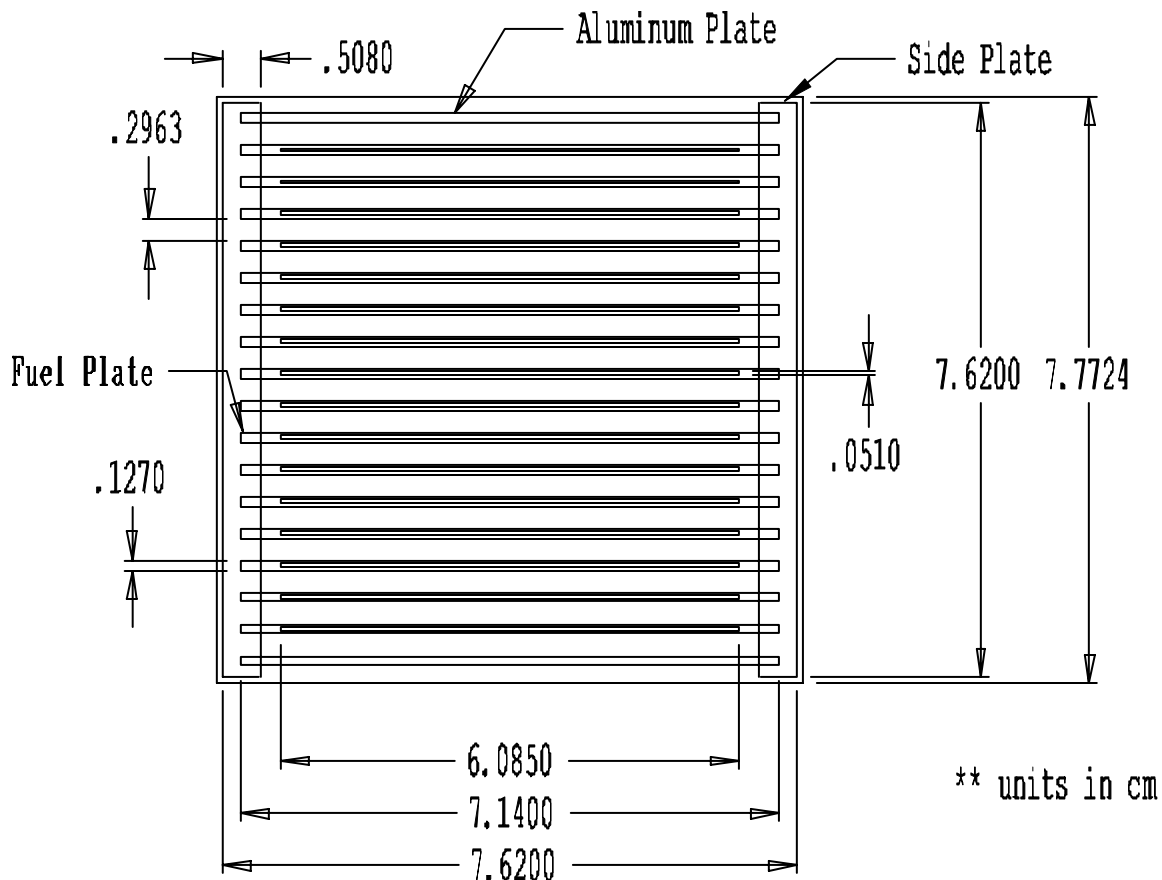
Standard LEU1618 fuel assembly geometry (modified slightly from Refs. 6-7).
